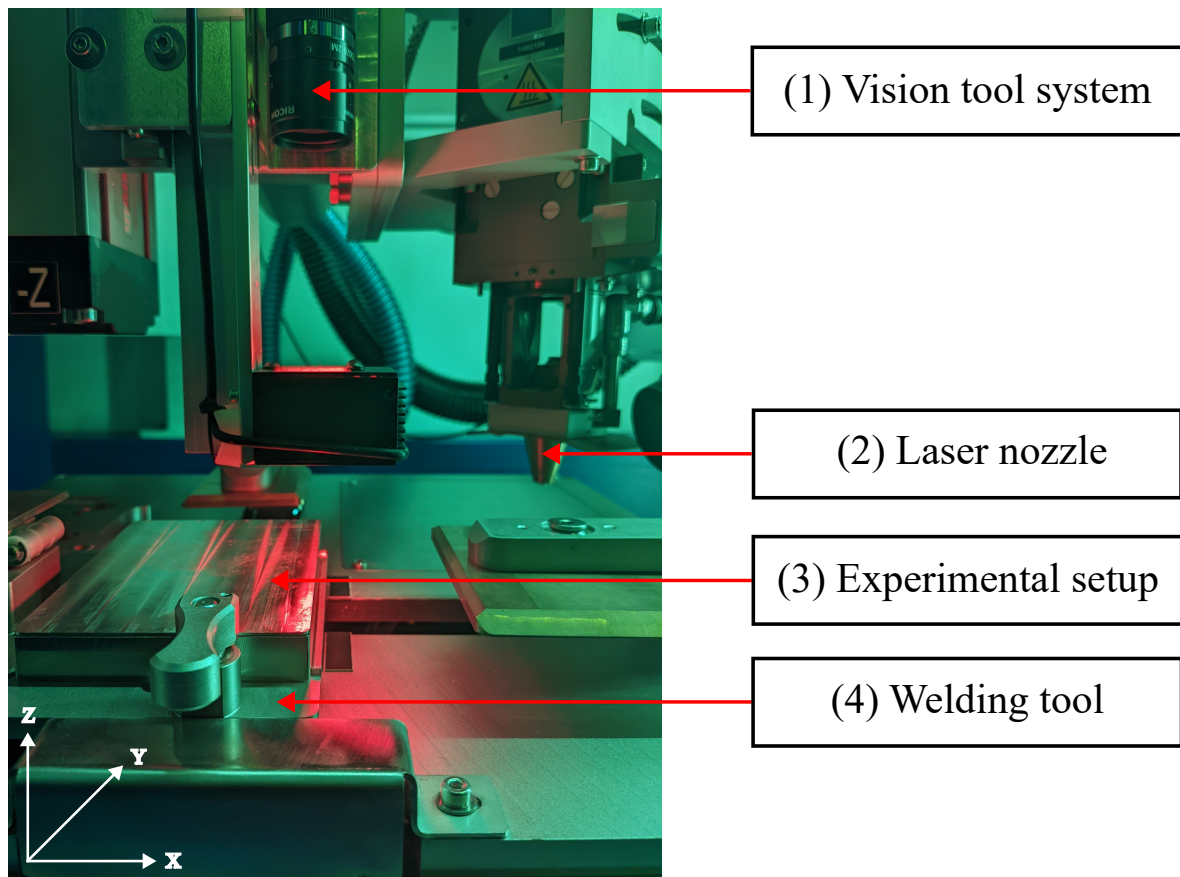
Laser welding machine implemented in CERCA<sup>TM</sup> laboratory
